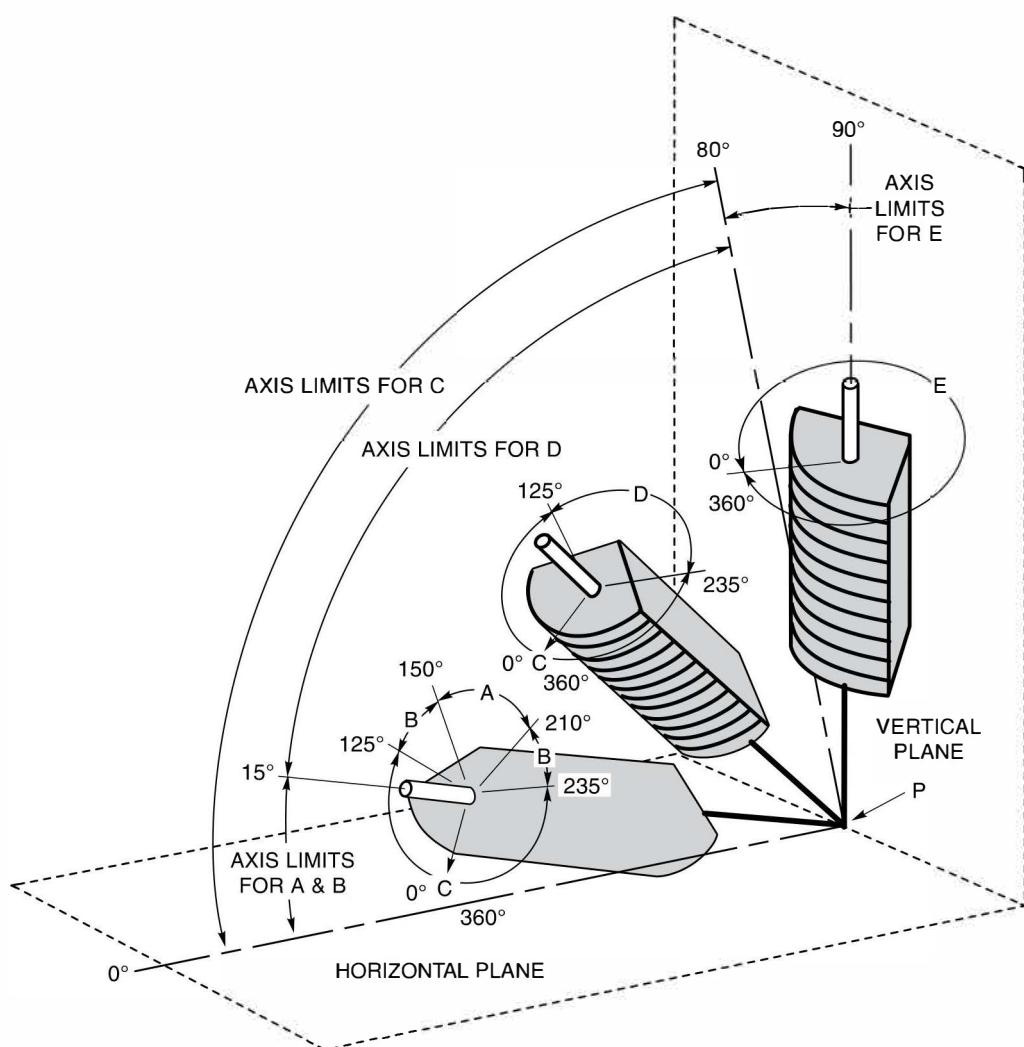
Positions of Fillet Welds (see 6.3.4)
